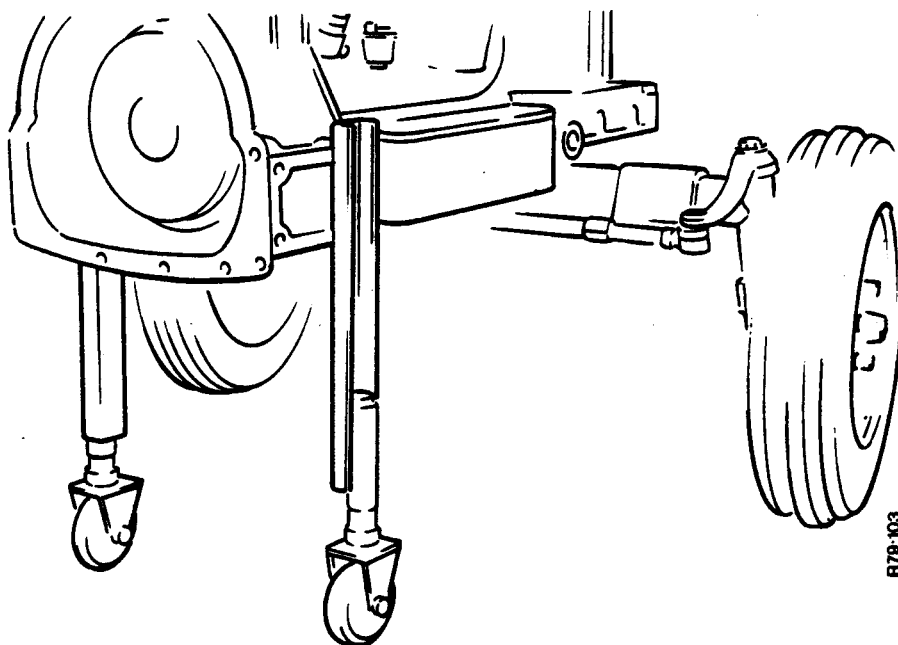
TRACTOR SEPARATED FOR ENGINE REMOVAL
